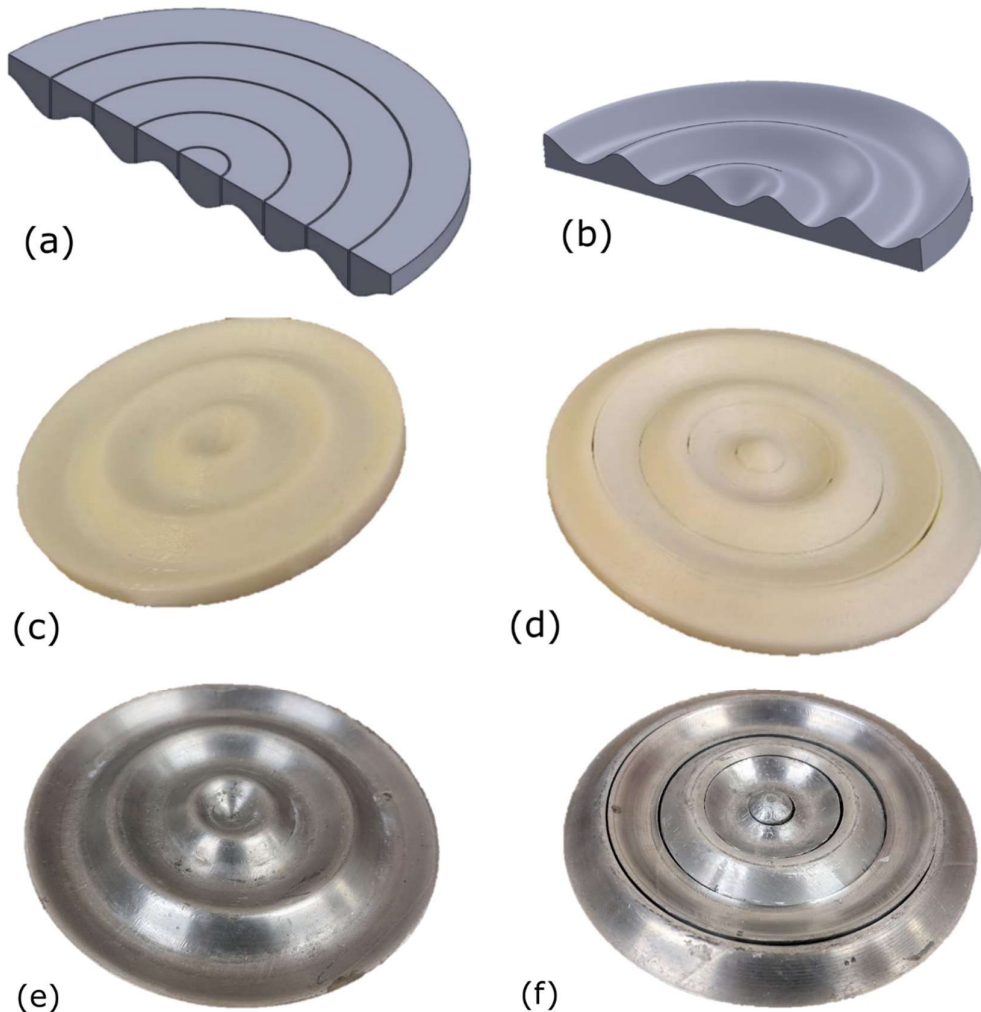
(a) CAD showing cross-section through segmented male ripple tool, (b) cross-section through female ripple tool, (c) 3D printed ABS single piece female ripple tool, (d) 3D printed ABS segmented male ripple tool, (e) single piece aluminium female tooling, (f) segmented aluminium male tooling.
